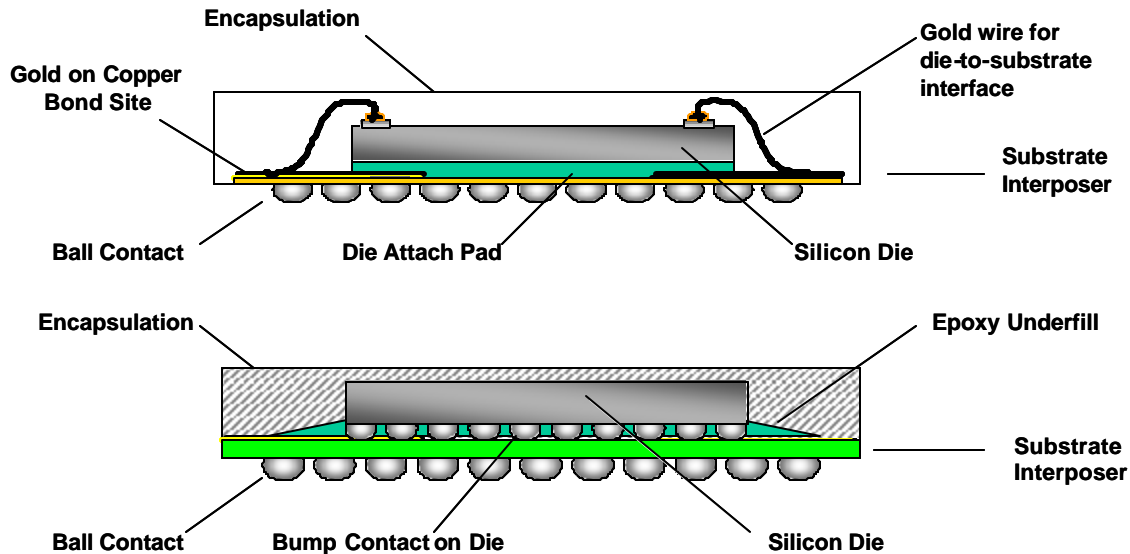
This Detail Illustrates Two Common Assembly Process Methodologies for Single Die BGA and CSP Packaging
